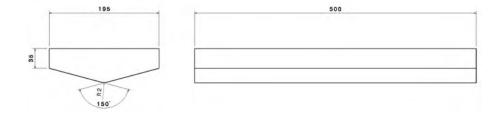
Geometry of the V-shaped striker of the radial impact test, dimensions are in mm.
